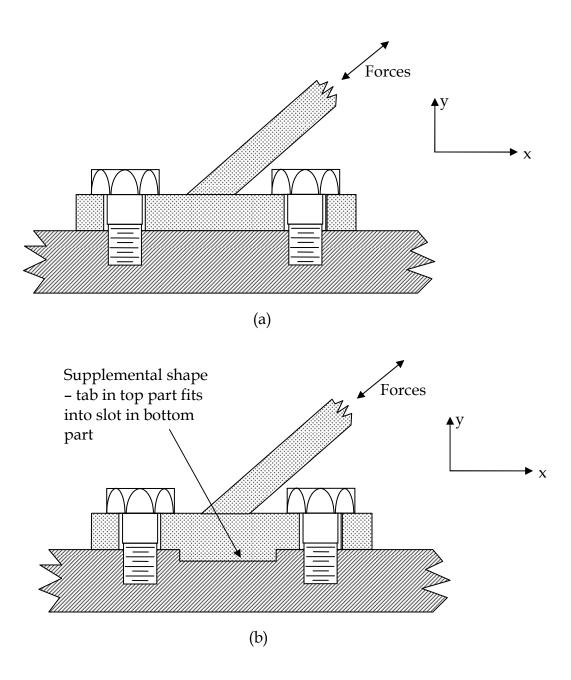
Joint design illustrating: (a) no shape specialization, bolts carry x-direction (shear) and y-direction (tension) forces, and (b) shape specialization, bottom tab carries x-direction forces, and bolts carry y-direction forces.
